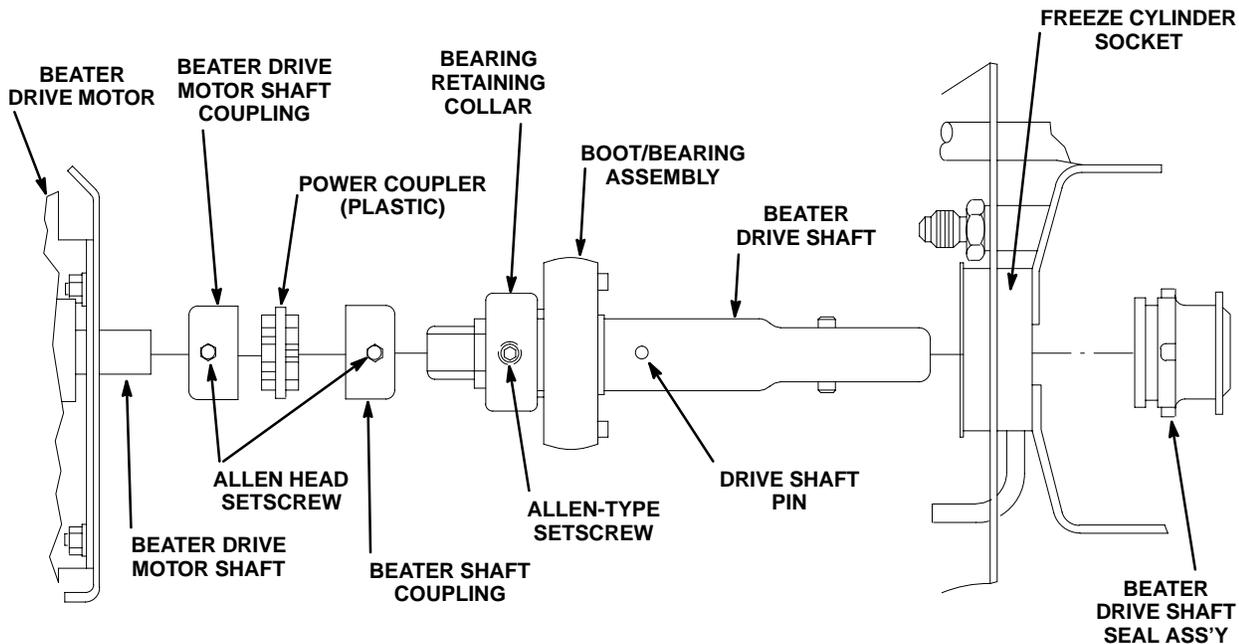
BEATER DRIVE MOTOR AND SHAFT SEAL ASS'Y REPLACEMENT
